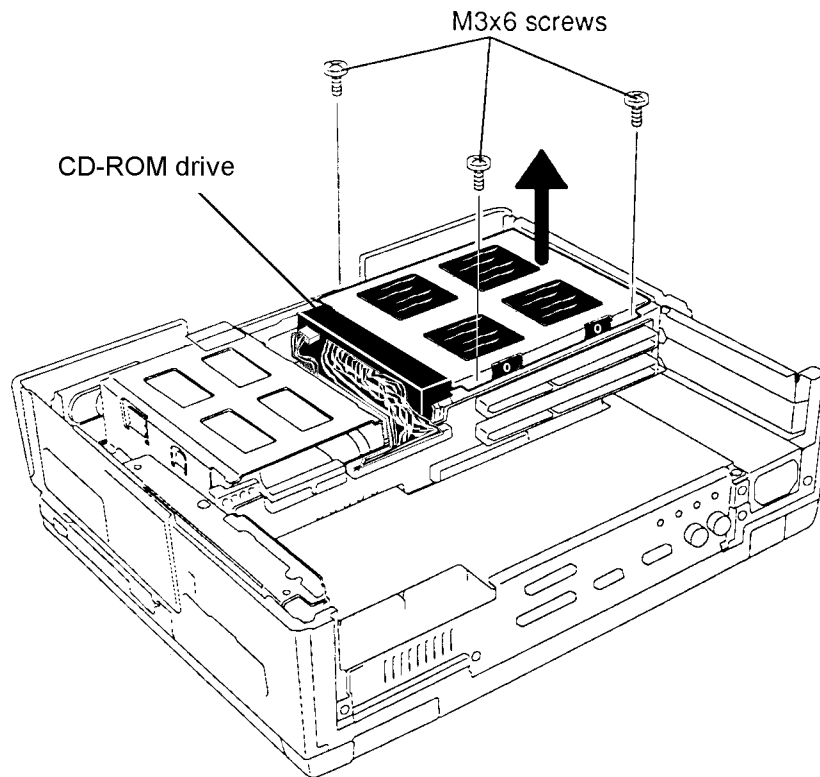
Removing the Screws on the CD-ROM Assembly
